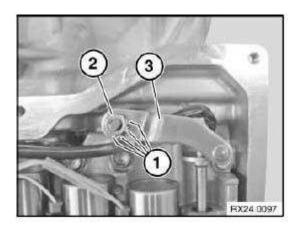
Identifying Retaining Lugs, Slacken Nut And Valve Lever Courtesy of BMW OF NORTH AMERICA, INC.
